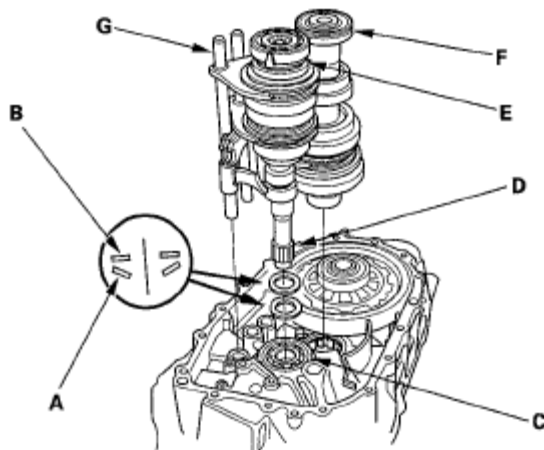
Identifying Spring Washer, Washer And Ball Bearing
